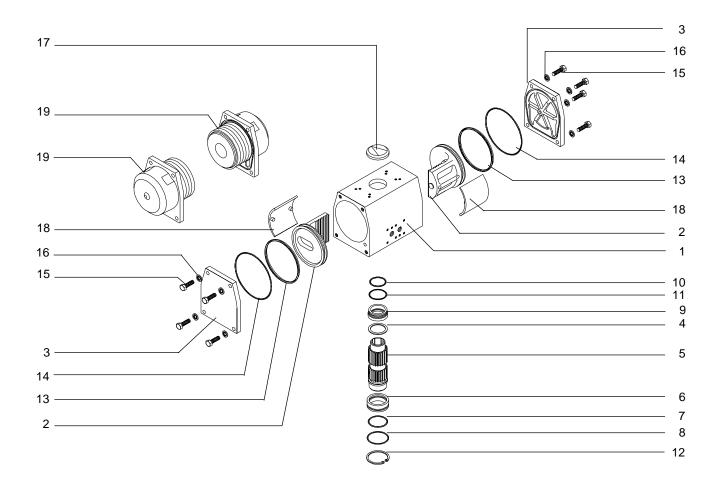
Top View of (Fail Open) Single Acting Actuator Assembly - Model 065-091
